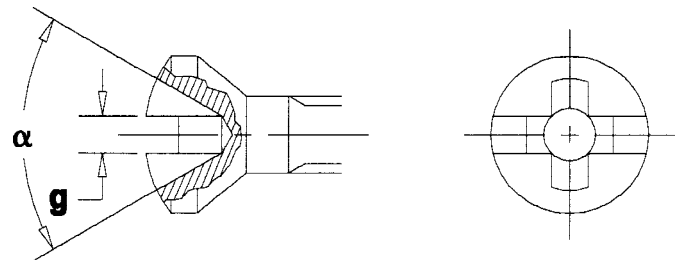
Schematic of Screw with Combined Single-Slot and Cross-Recessed Drive Connection (Table A6.3)
